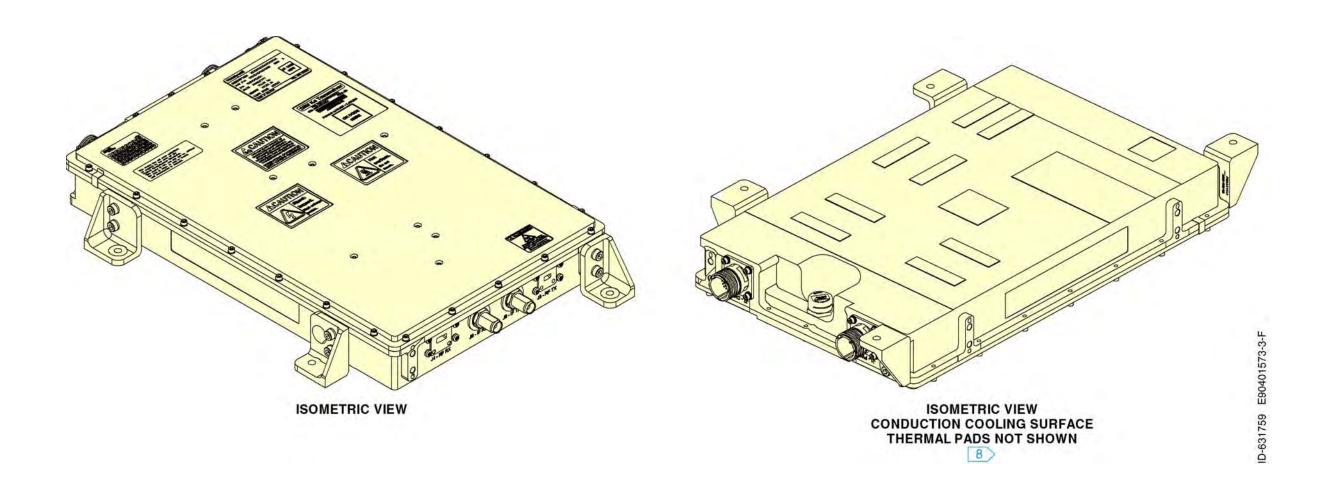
(Sheet 4 of 9) KRFU, Conduction-Cooled 1, Outline and Installation Drawing (90401573, REV F)
